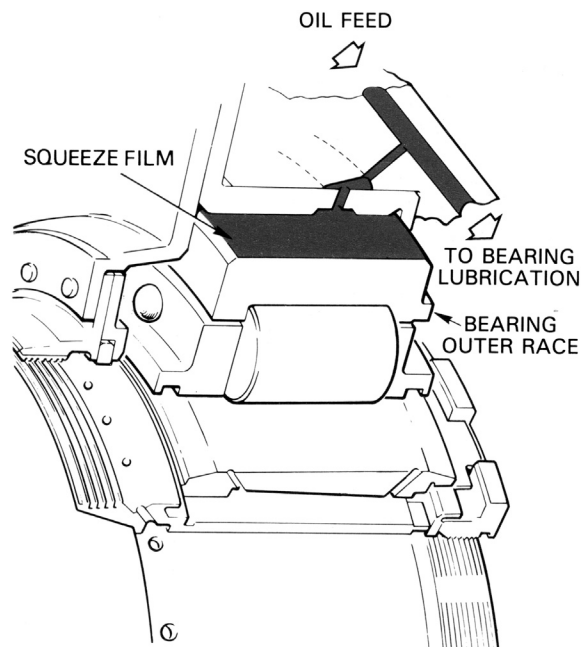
A squeeze film bearing. (Source: Rolls Royce.)
